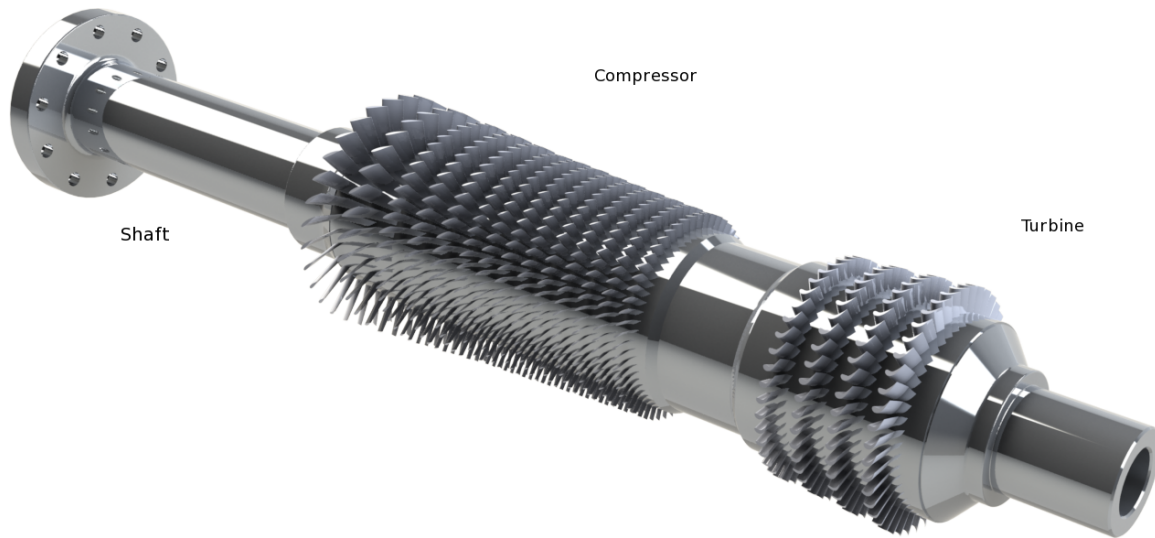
The figure shows the shaft that connects the compressor and turbine with the rotor blades mounted on it. The combustion chamber that is placed in between the compressor and turbine is not shown in this picture. Image taken from the author's MEEN 646-Class Project.
